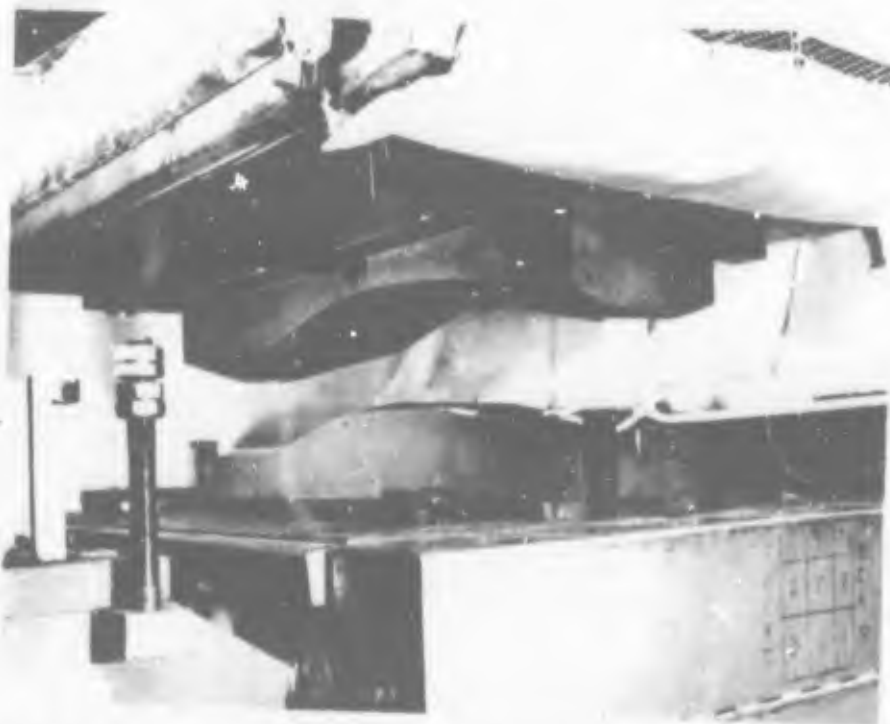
Flat Blank Being Placed on Heated Draw Die. Blank Could Also be Placed on Die After the Draw Ring is Raised.
